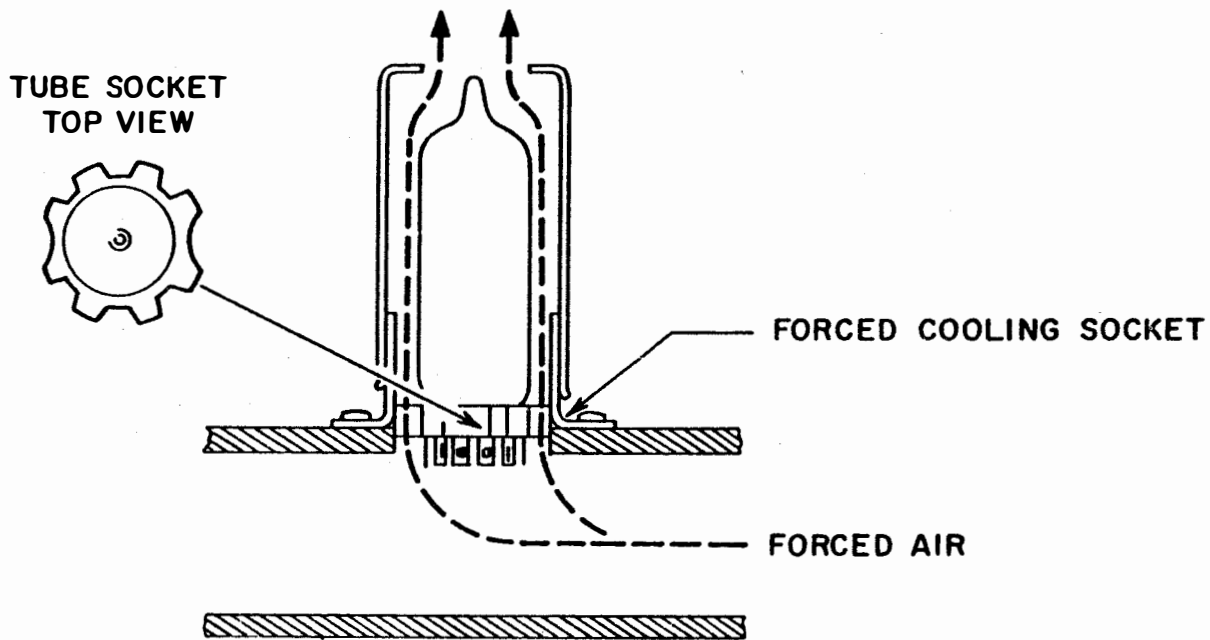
FORCED-AIR COOLING SOCKET ON CONVENTIONAL PAN CHASSIS TYPE EQUIPMENT
